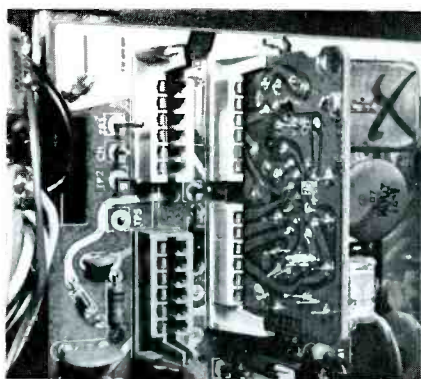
Early modular RCA receivers had many modules mounted edgewise to the chassis in spring-loaded sockets.
